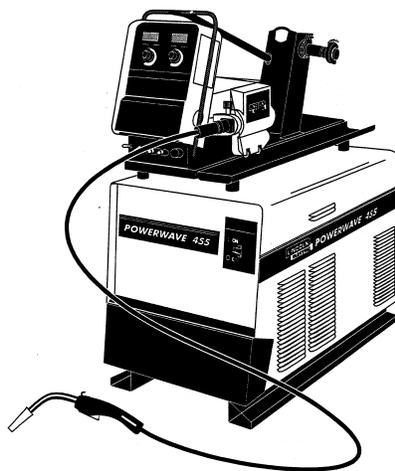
Components of the Lincoln Powerwave 455, GMAW system.
